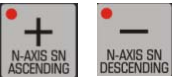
Machine control area of GSK218MC-H
